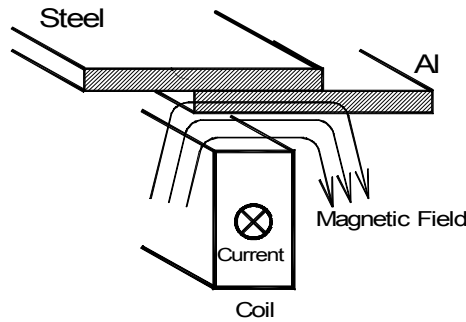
Principle of the MPW for welding of *Al/Steel* sheets sample (cross section view)
